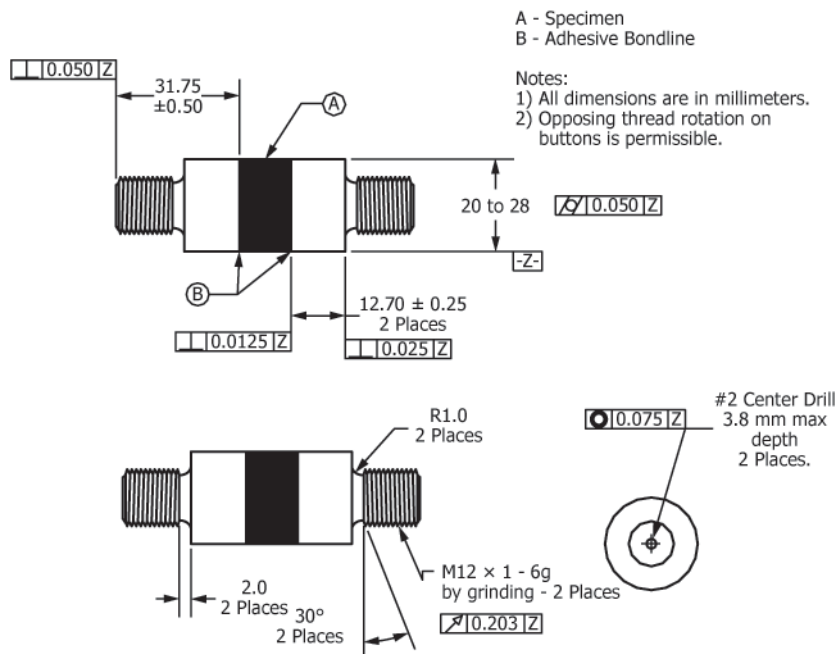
Drawing of End Tabs and Cylindrical Specimen Assembly (SI units)
